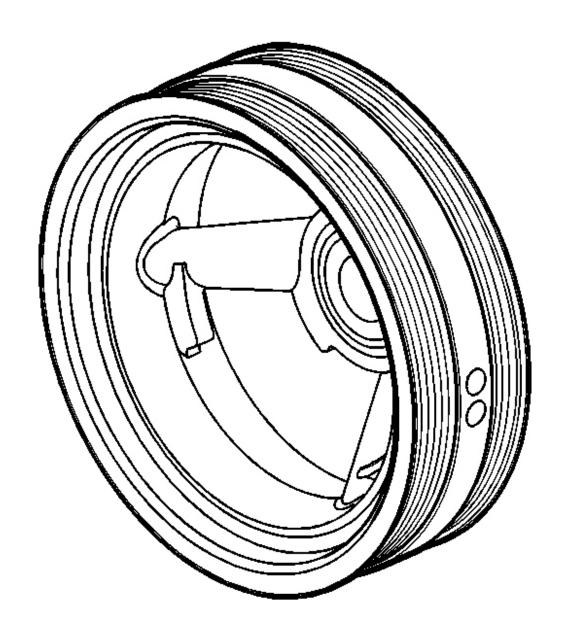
View Of Crankshaft Balancer Courtesy of GENERAL MOTORS CORP.
